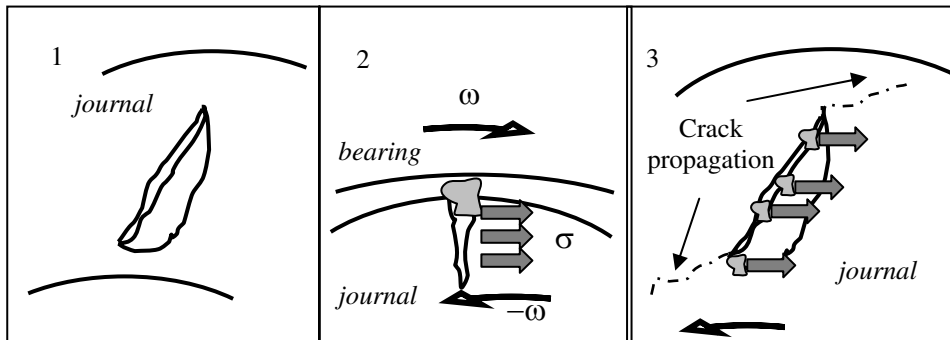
Schematic damage mechanism under abrasion fatigue after a pre-existing crack.
